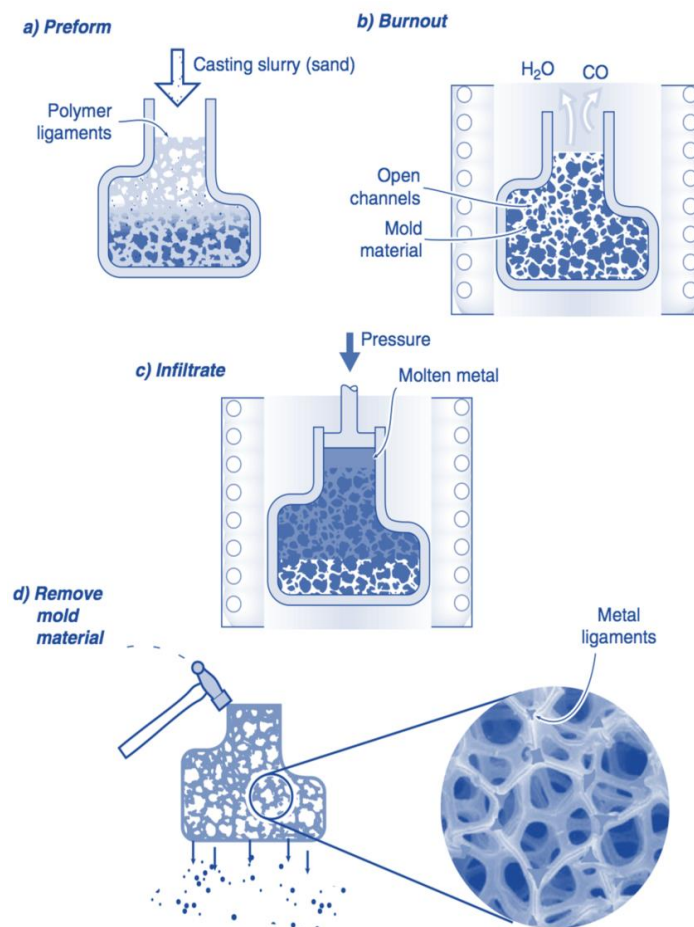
Investment casting method used to manufacture open-cell foams [66].
